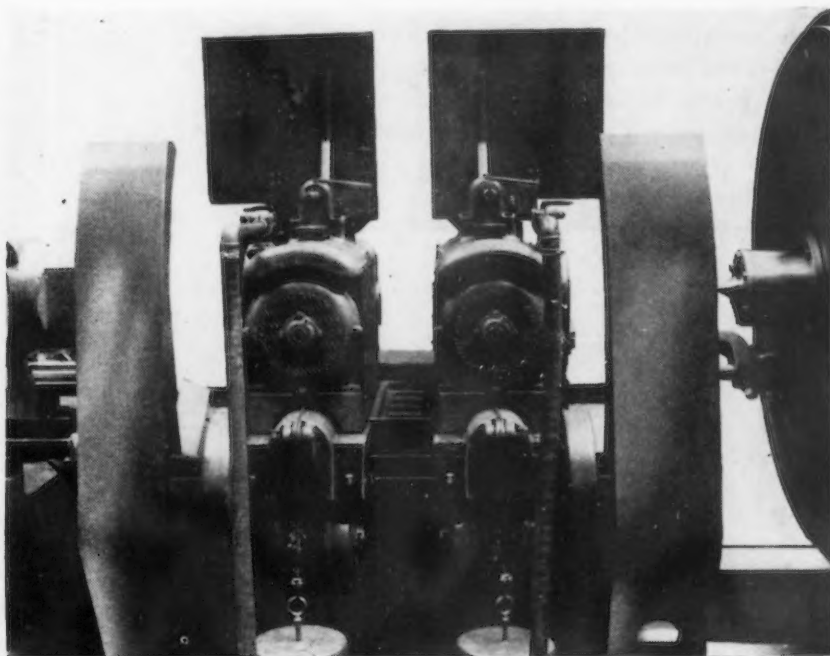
Rear view of grinding heads with distance piece between them for grinding shorter journals.
